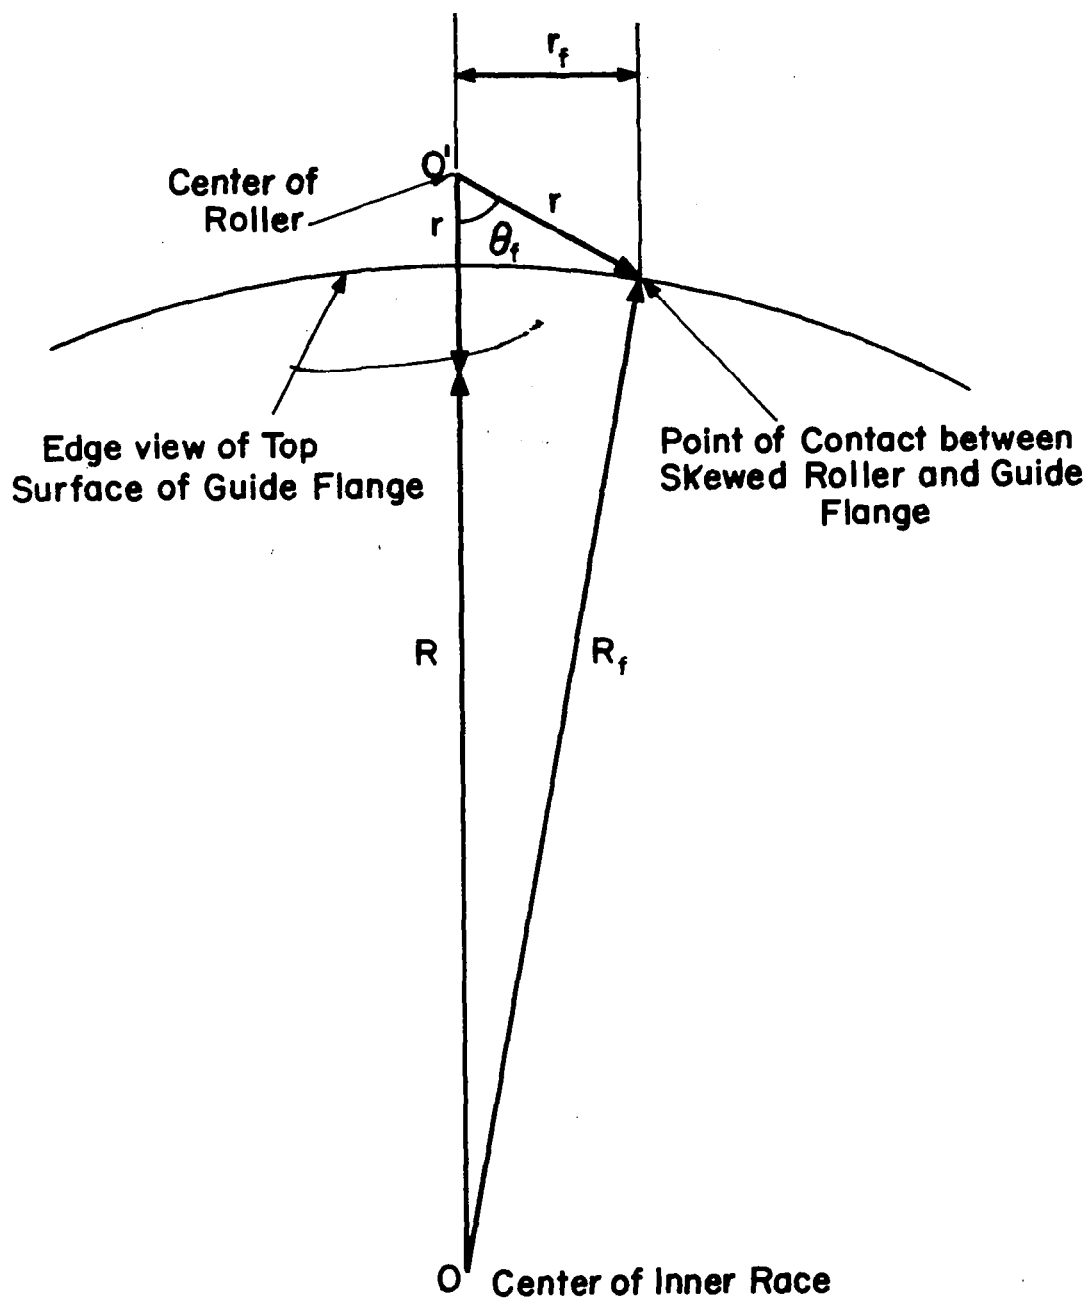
The Geometry of the Roller Bearing System Used to Establish the Point of Contact Between a Skewed Roller and the Guide Flange
